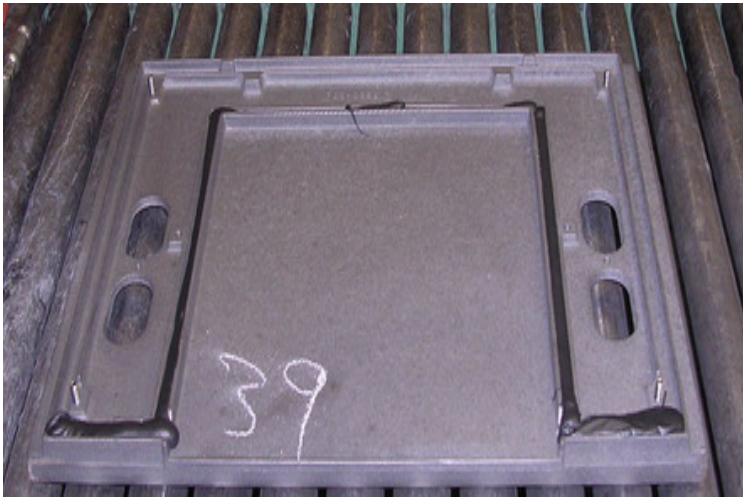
Lay a solid bead of furnace cement in the grooves of the outer bottom
